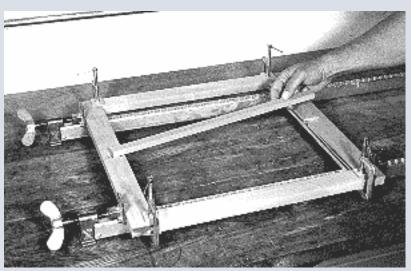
Join the drawer frames with groove and tenon joints cut at the table saw, then glue them up as shown. Install drawer guides in the front and rear pieces.
